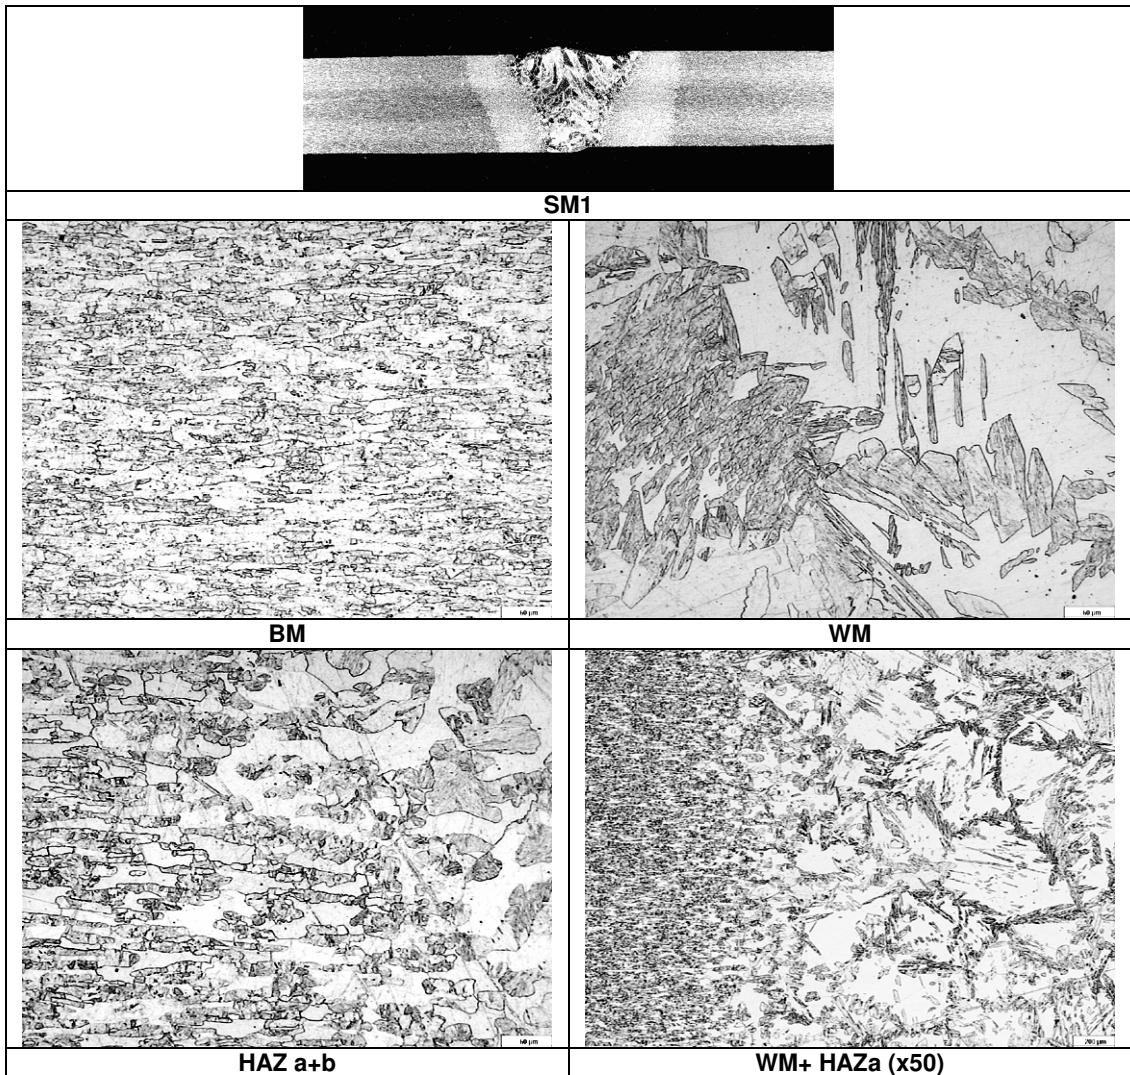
Macro and microphotographs of 6 mm thick Plasma weld without filler metal (S).
